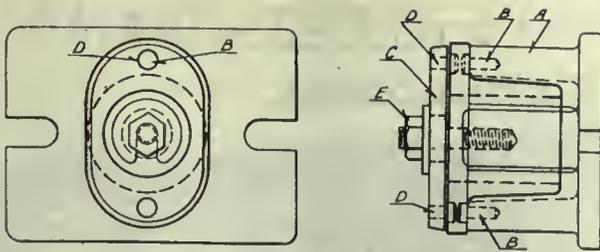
ANOTHER SIMPLE FIXTURE.
